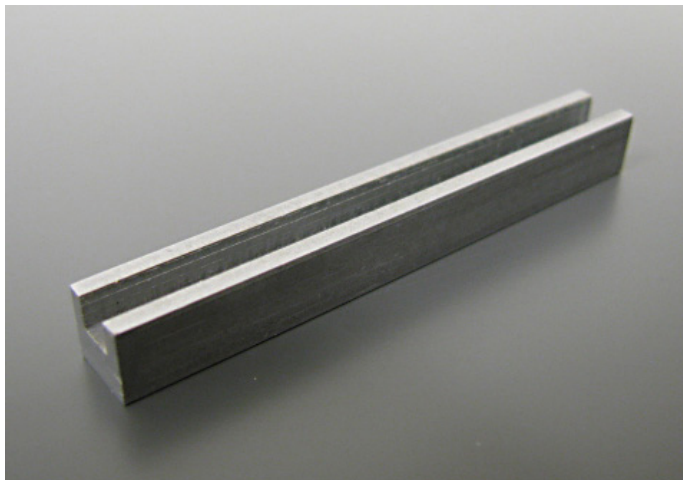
The 1/4" blank with a slot cut to hold the 1/8" tool.
